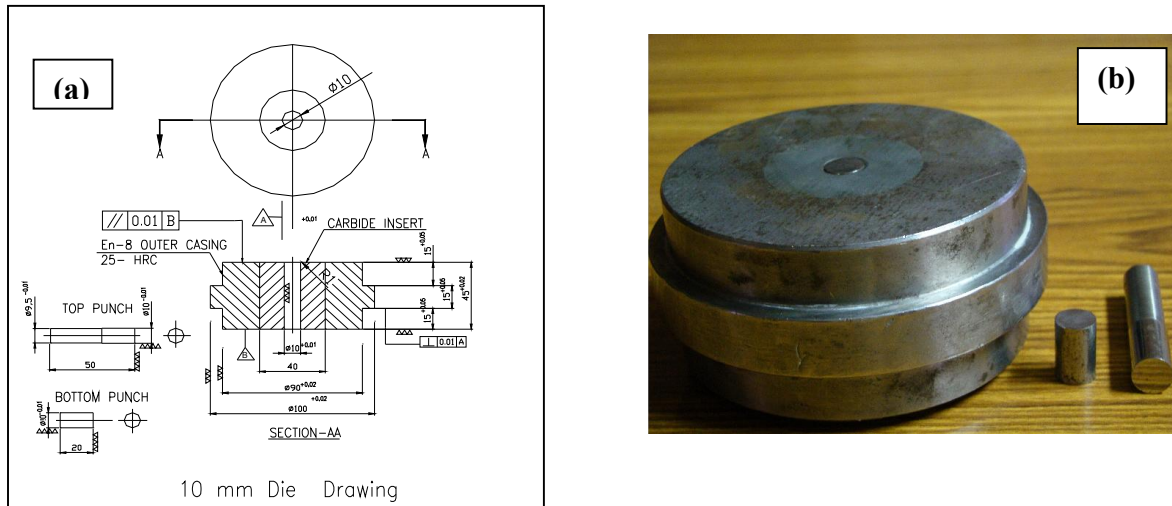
(a) Engineering drawing of the Compaction Die and (b) compaction die along with bottom and top punches
